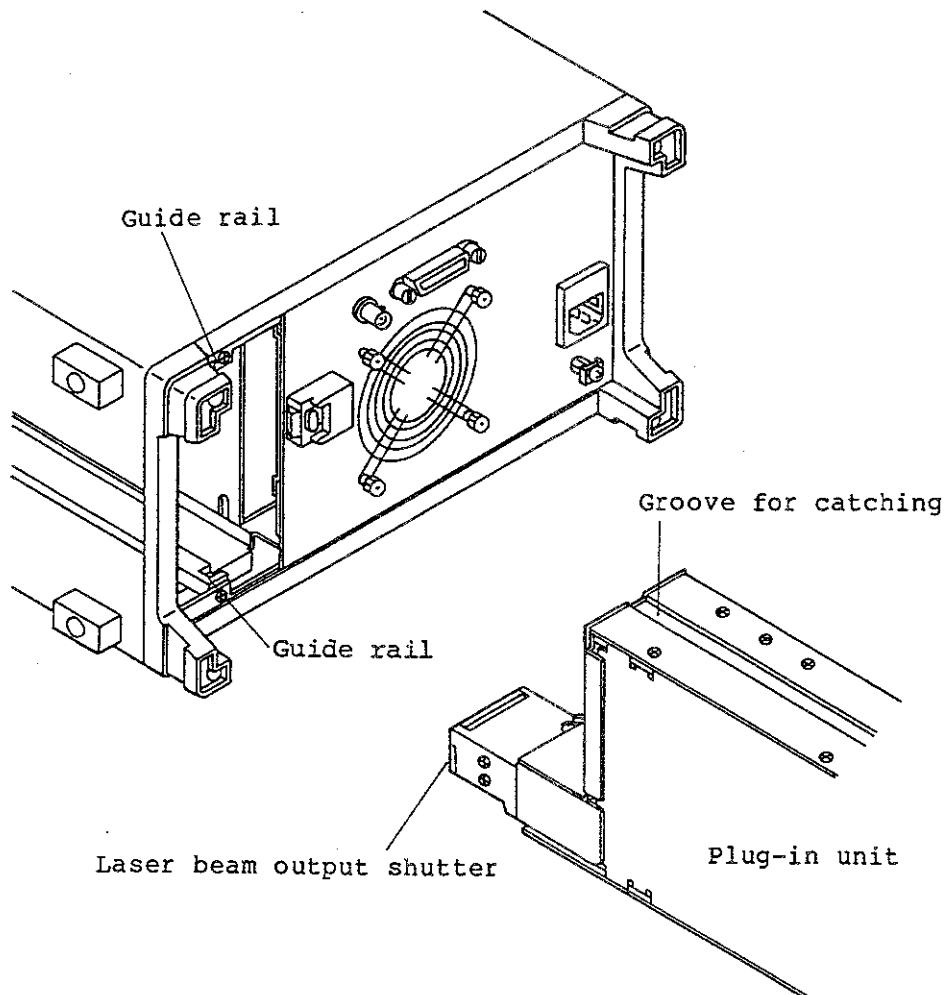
5 Mounting and Dismounting the Plug-in Unit
